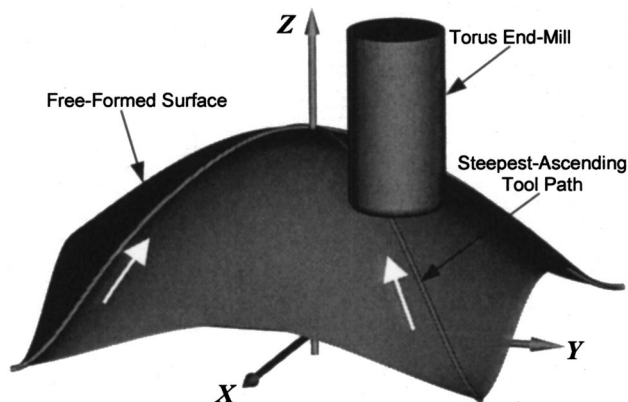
Steepest-ascending tool paths for a sculptured surface
